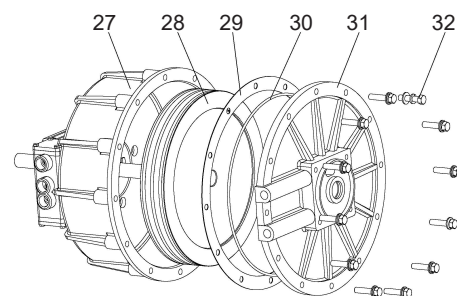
Disassembly of piston assembly 活塞组件拆卸
